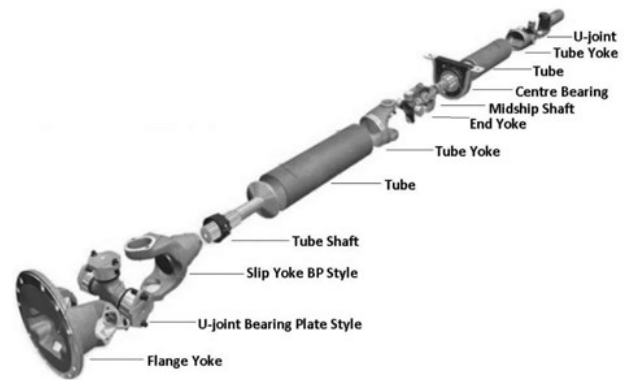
Driveshaft fitted with bearings (Gupta & Khurmi, 2009)
